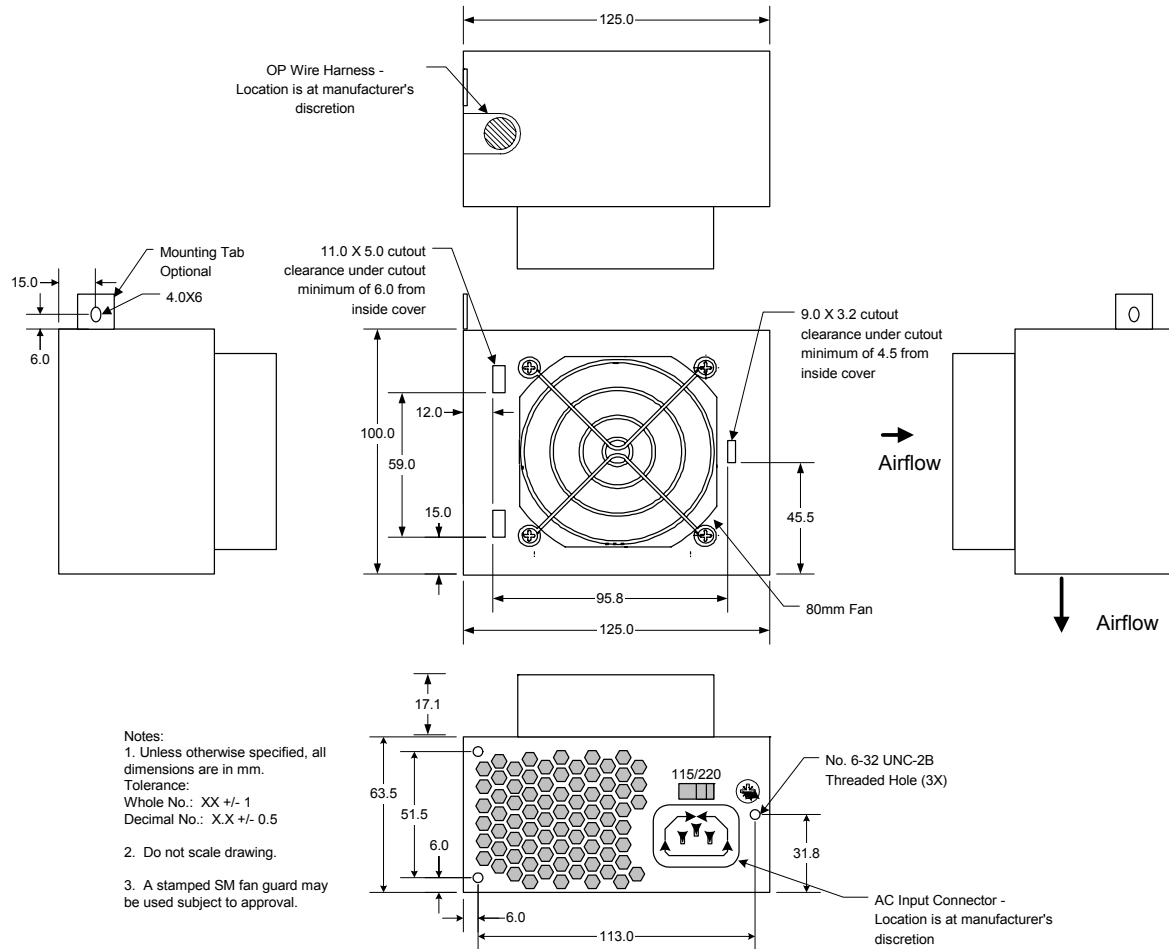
Reduced Depth Top Mount Fan Profile Mechanical Outline
